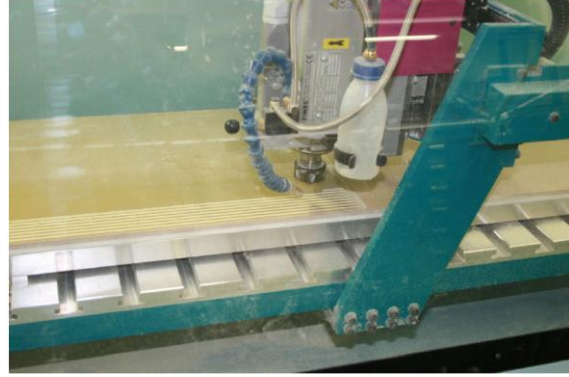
PHOTOGRAPH OF THE CAM MACHINE CUTTING THE INTER-LAYER INSULATION.
